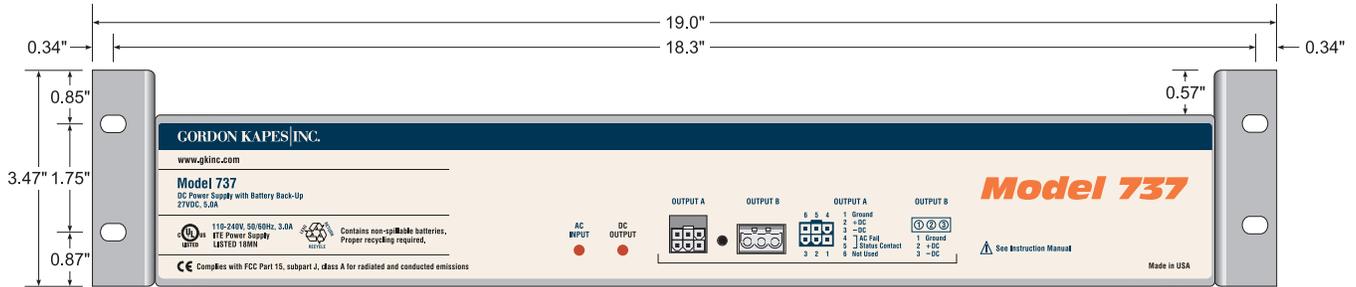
Front view of Model 737 cabinet showing 19-inch flush rack-mount brackets attached
